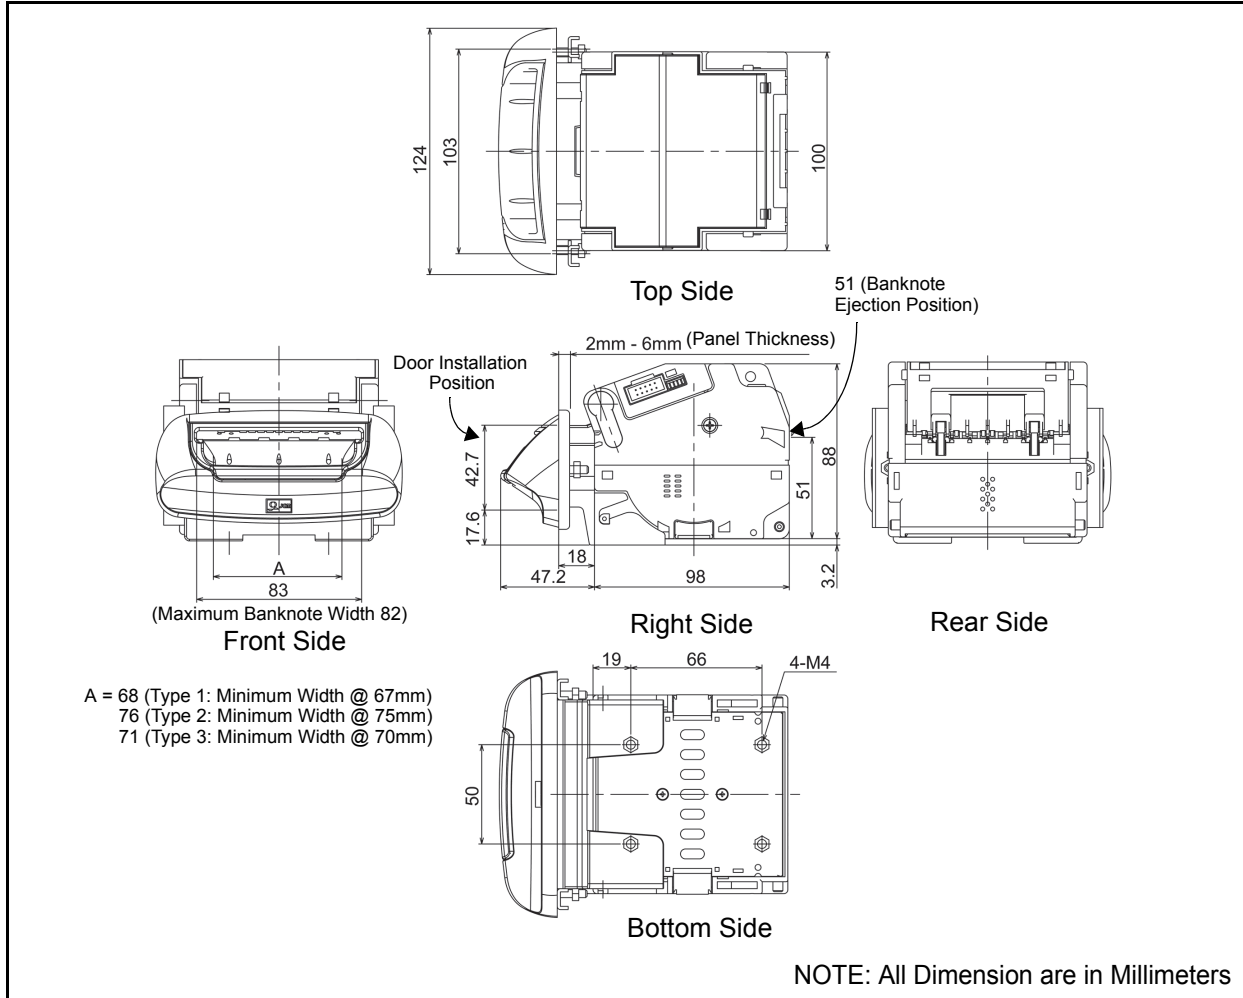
Taiko PUB-7 Complete Unit Outside Dimensions
